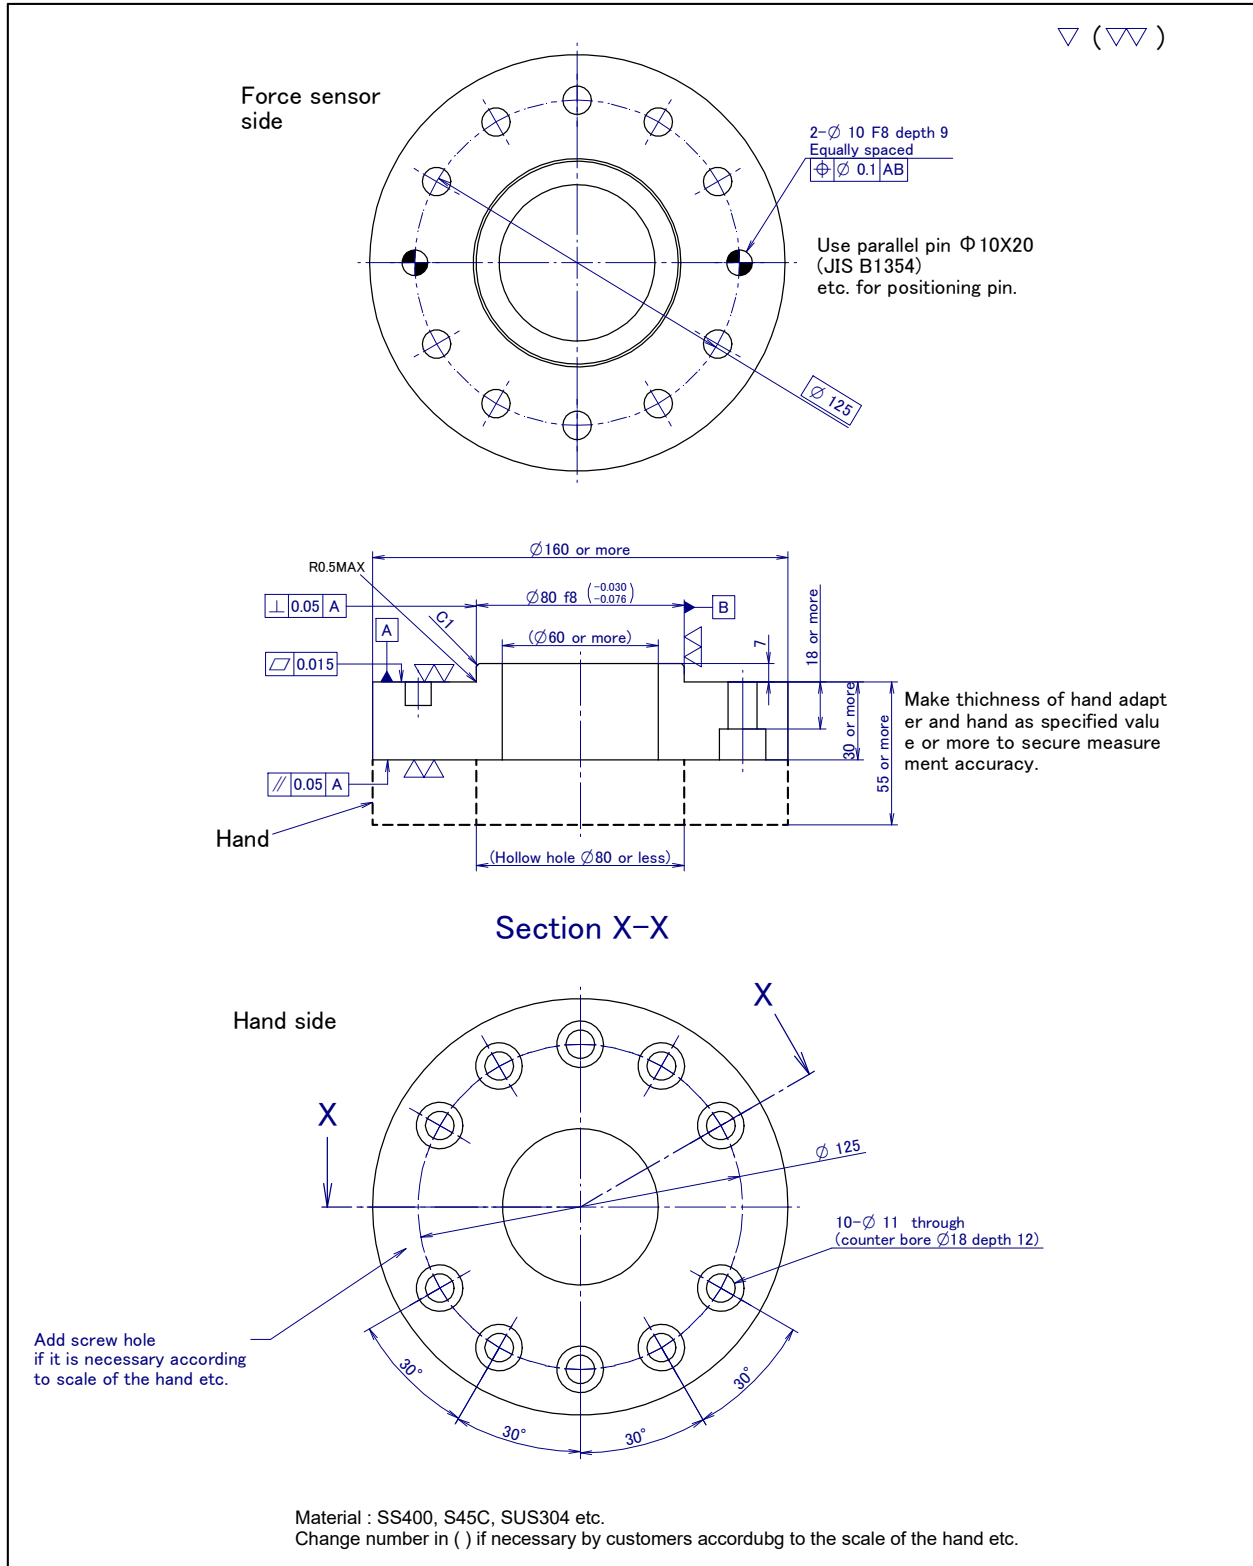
(d) Example of designing the hand mounting adapter (FS-250iA)
